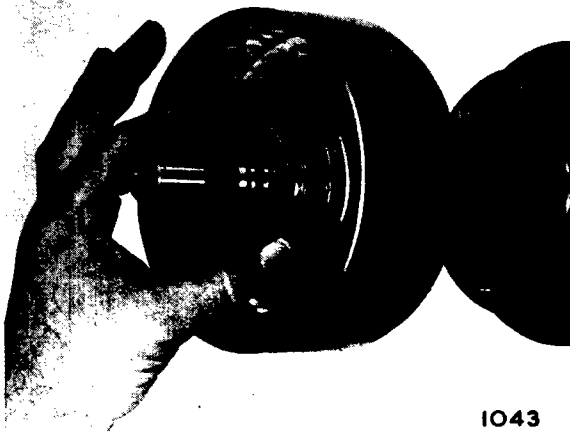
Fitting the front clutch cylinder thrust washer
